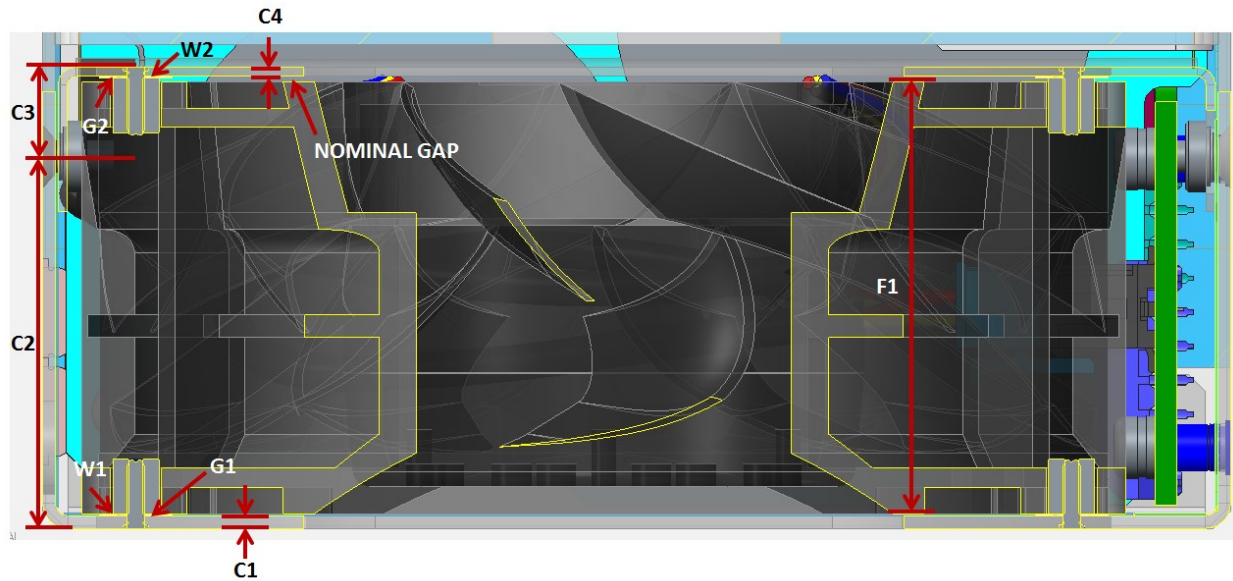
GEN1A/GEN2A Fan Unit Vertical Tolerance Analysis
